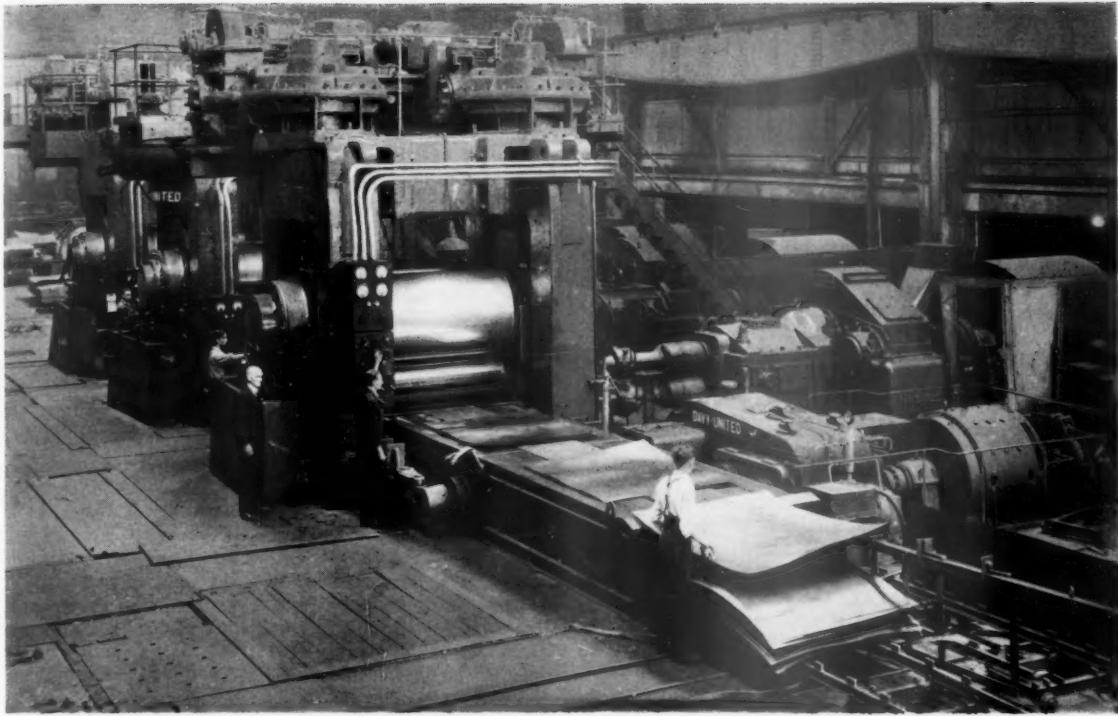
Lysaght's 3-Stand 4-Hi piece mill.
